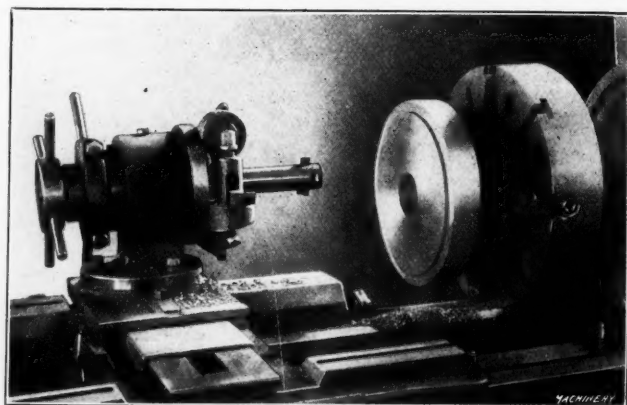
Turret Toolpost set up on a Lathe for Boring Operation
